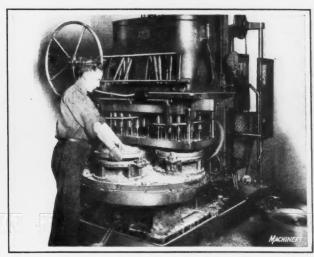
Drilling Holes in the Flywheel on a Multiple-spindle Machine
